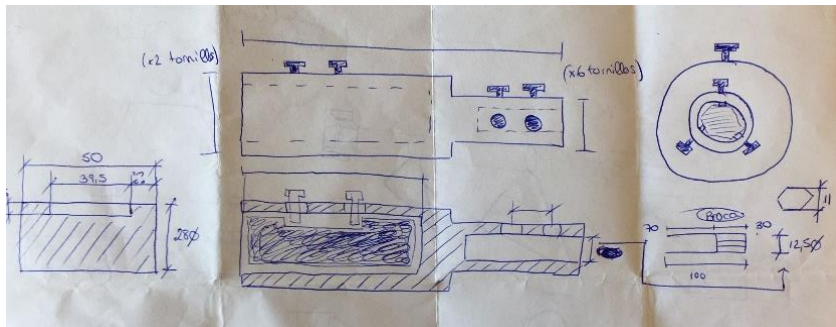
Left - Sketch of the shaft and spindle anchored part; Right - shaft transmission part made of steel.
